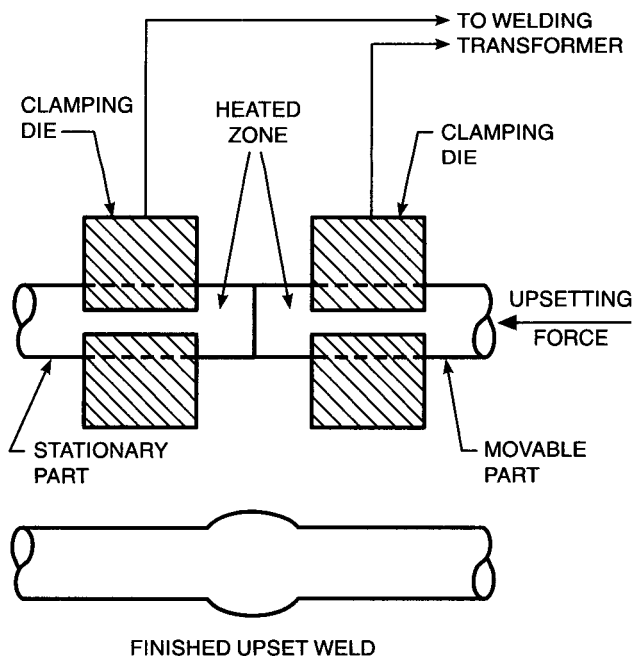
General Arrangement for Upset Welding of Bars, Rods, and Pipes
